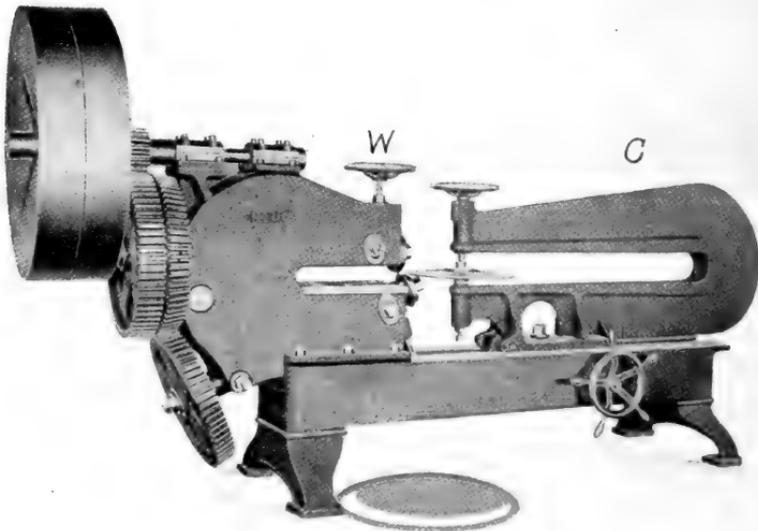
Circular Shears with Angular Cutter Shafts.
